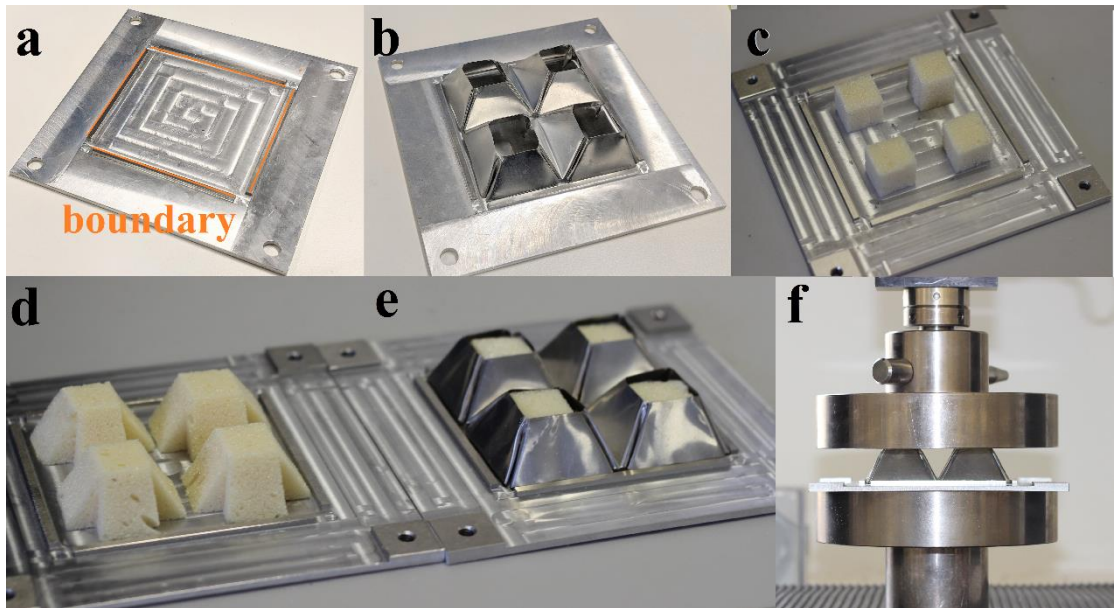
(a) steel base plate with 2 mm high boundary strip; (b) TSP foldcore without foam infill; (c) cubic foam units; (d) shaped foam units; (e) shaped foam filled TSP foldcore; (f) crushing of foldcore specimen
